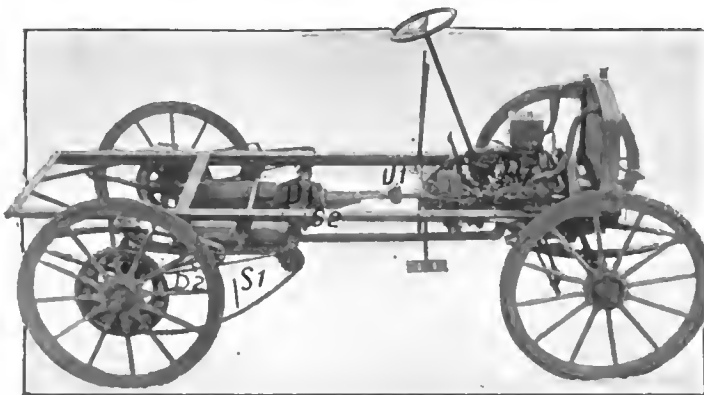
Chassis presenting the mechanical layout with motor in front, independent differential system, and side chain drive
